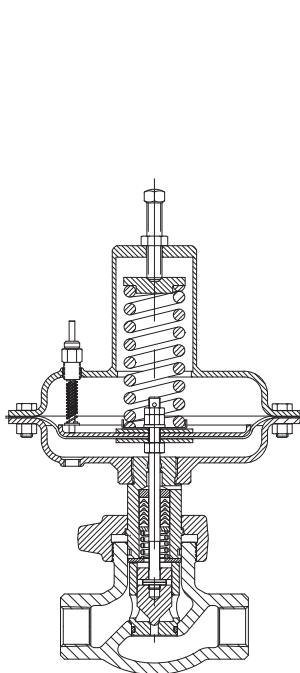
1.00" Series 2220 valve with a no. 9 reverse (spring closing) actuator. Throttle trim, flow up.
